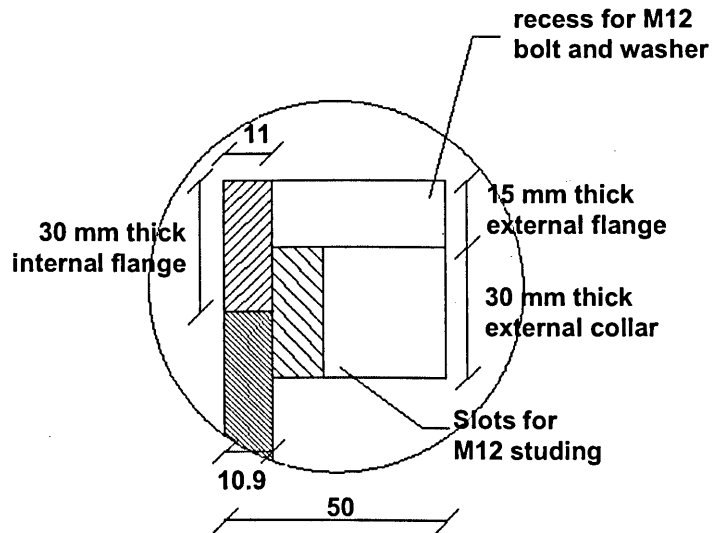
Elevation view for clamping bolt type 1 (A) from Section AA (all dimensions in mm, not to scale)
